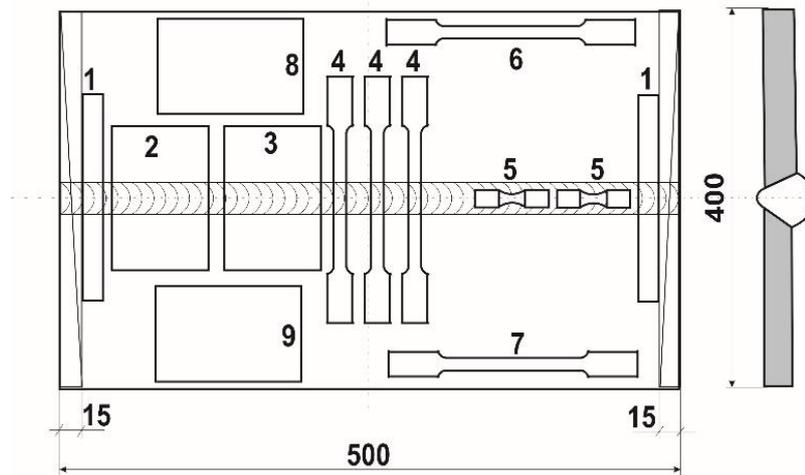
Appearance of the welded plate scheme and the test tube cutting plan
